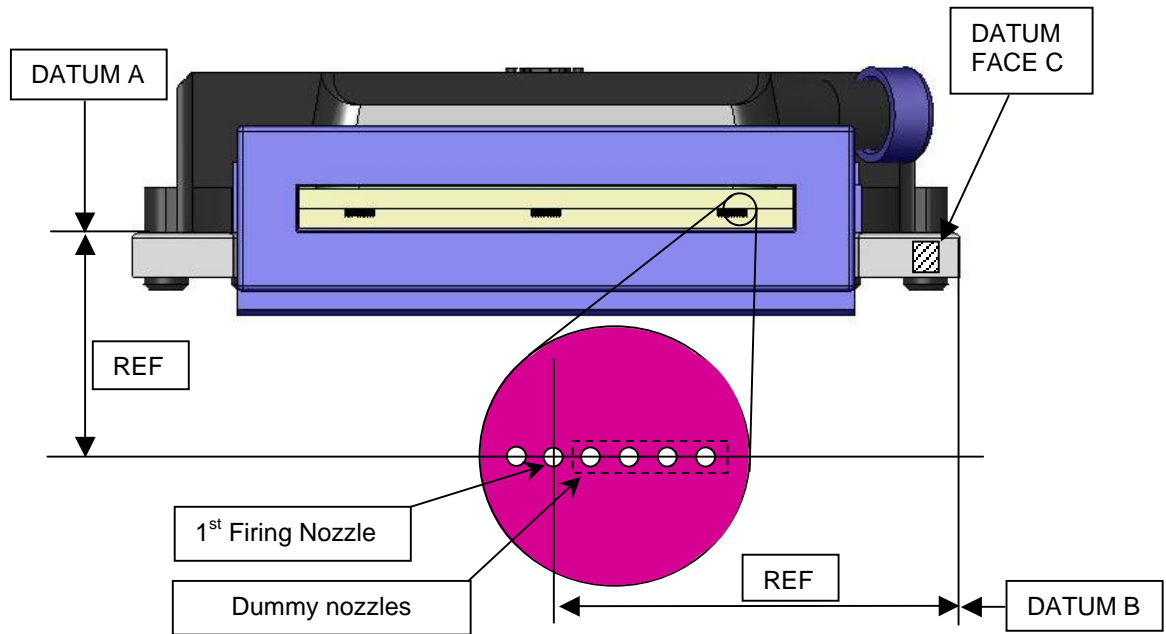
Datum reference to 1st firing nozzle
